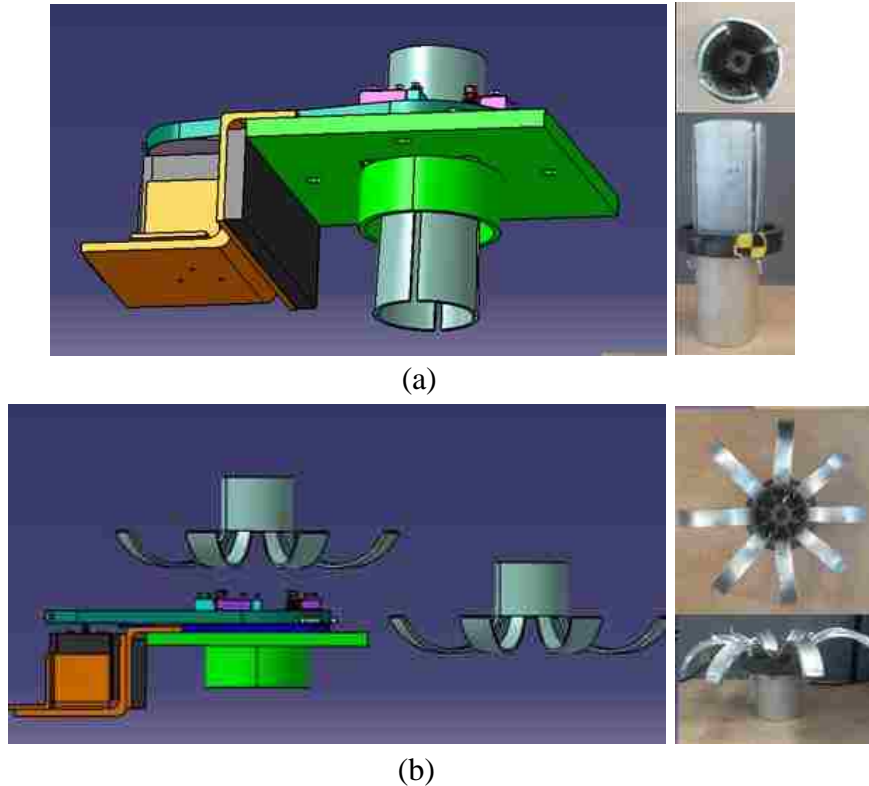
Comparison between petal flaring of 3.175 mm thick AA6061-T6 extrusions when cutting with (a) 4 blades. (b) 8 blades.
